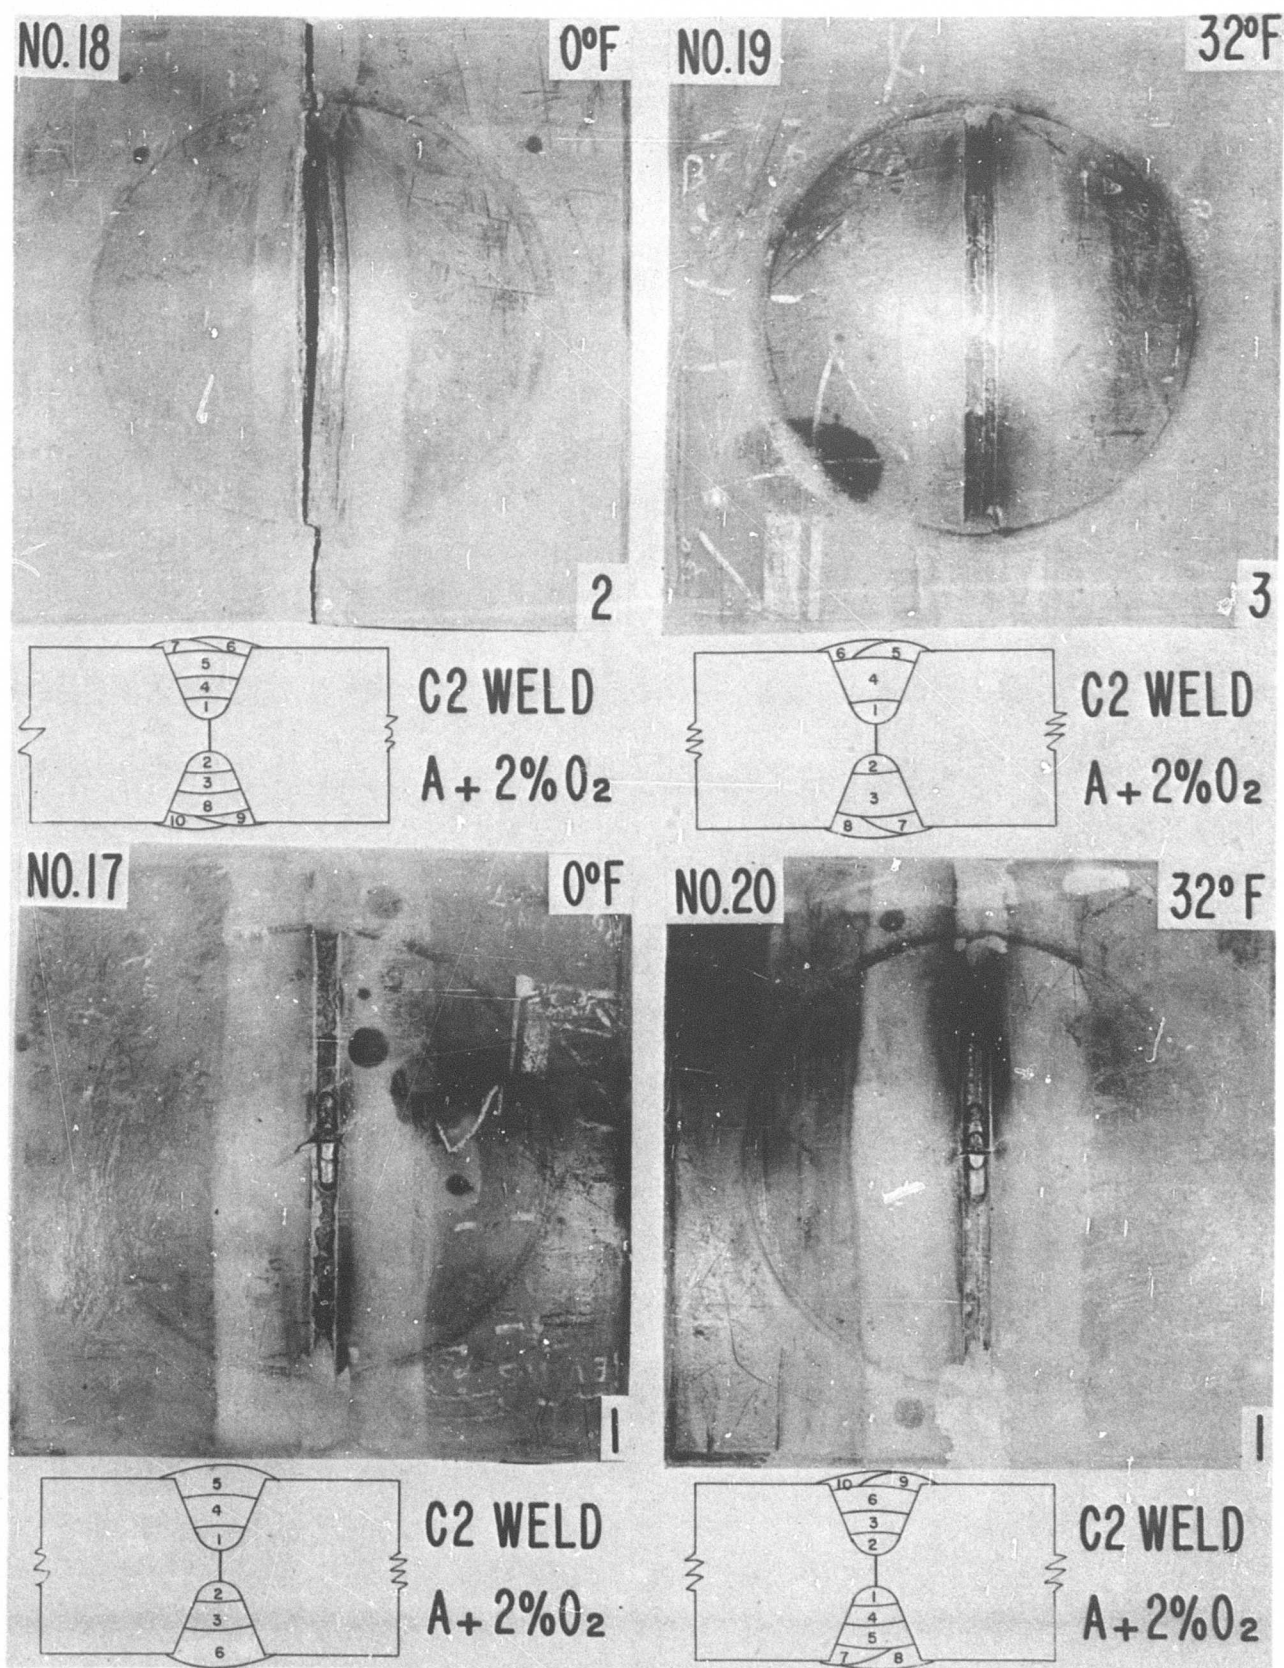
Explosion-bulge test fracture characteristics of inert-gas-shielded metal-arc weldments. Bottom weldments modified with crack-starter weld.
